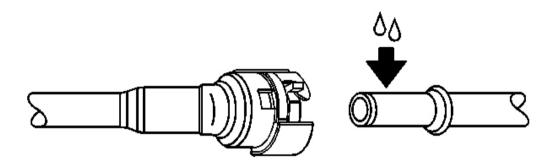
Oiling Male Pipe Ends Courtesy of GENERAL MOTORS CORP.
